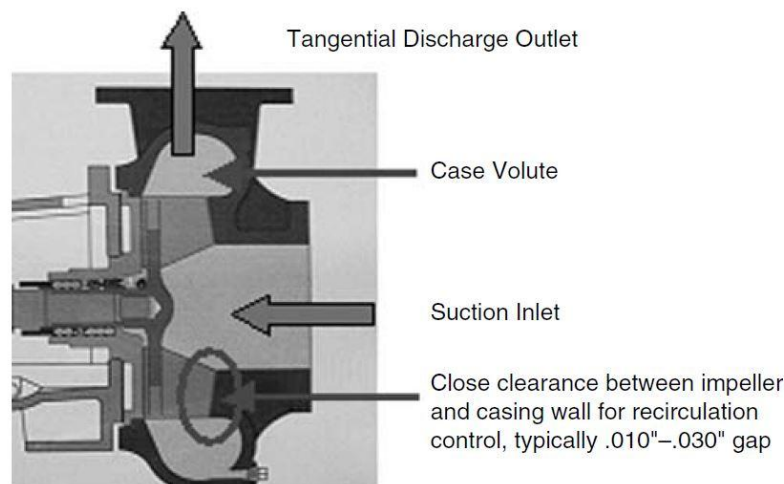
a: Tight tolerance casing serves as front of open style impeller
